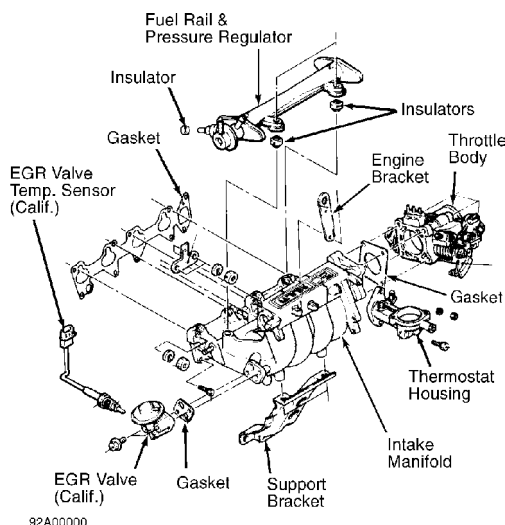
Exploded View Of Intake Manifold (1.5L Except Precis)
